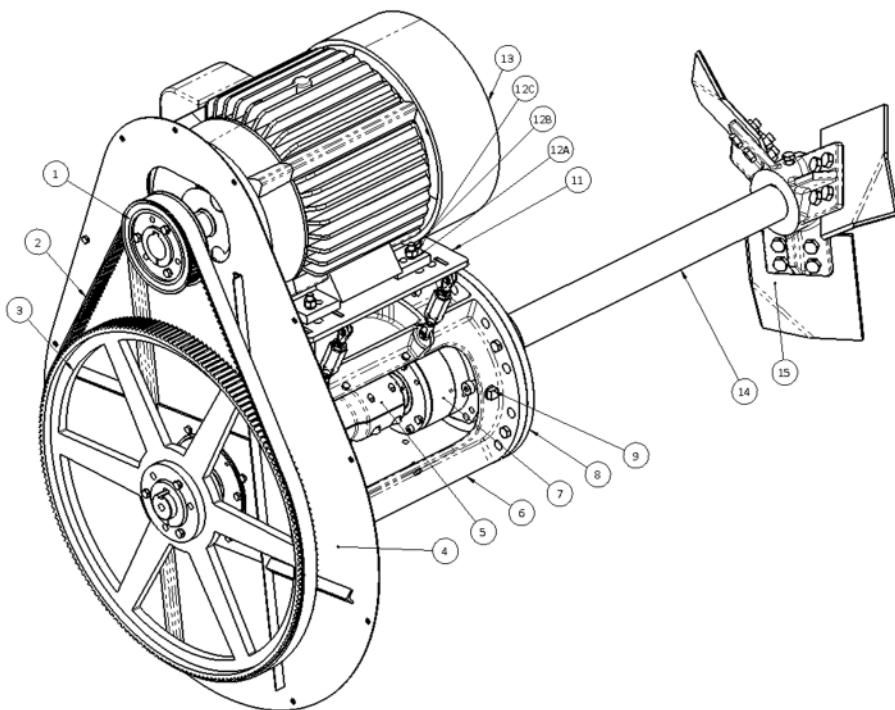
Fixed Mixer Assembly (Belt guard Removed)
